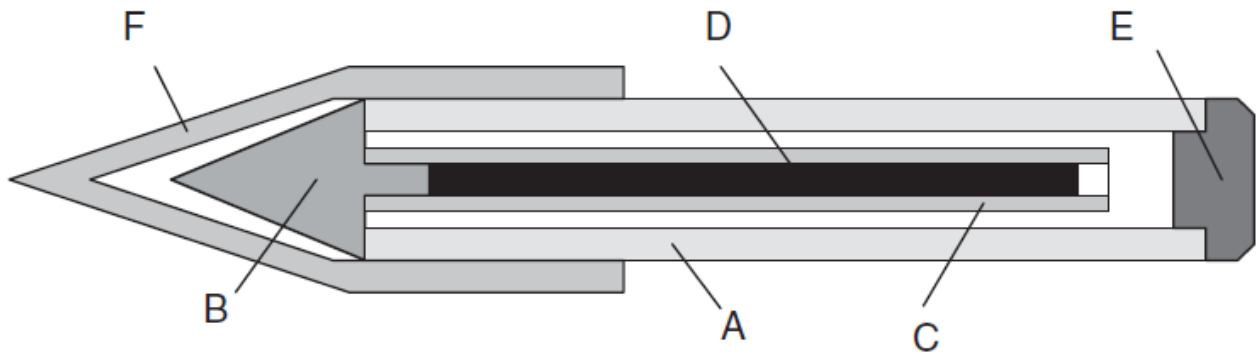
Assembly drawing of Bourjault's Ballpoint [36]
